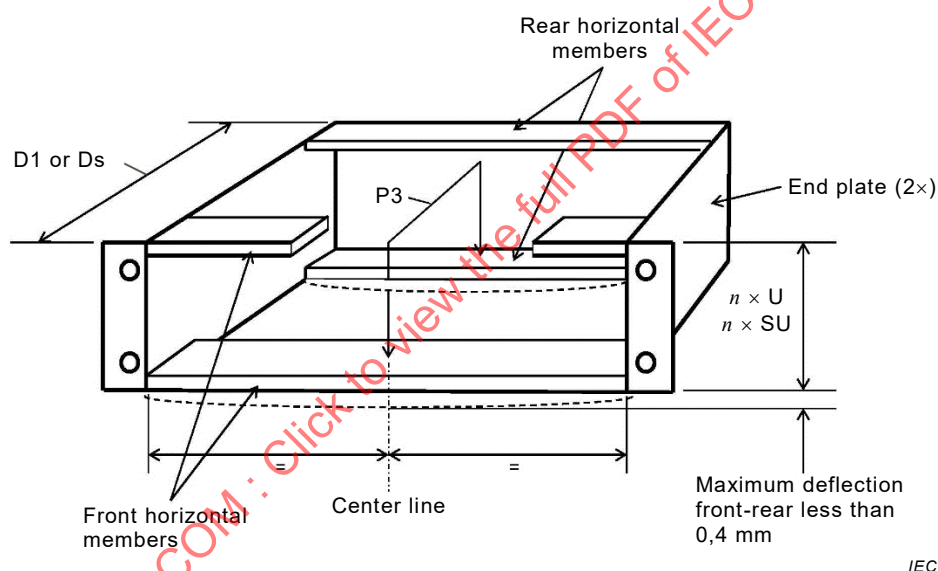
Static mechanical load test fixture for a sub rack or a chassis with an integrated sub rack
